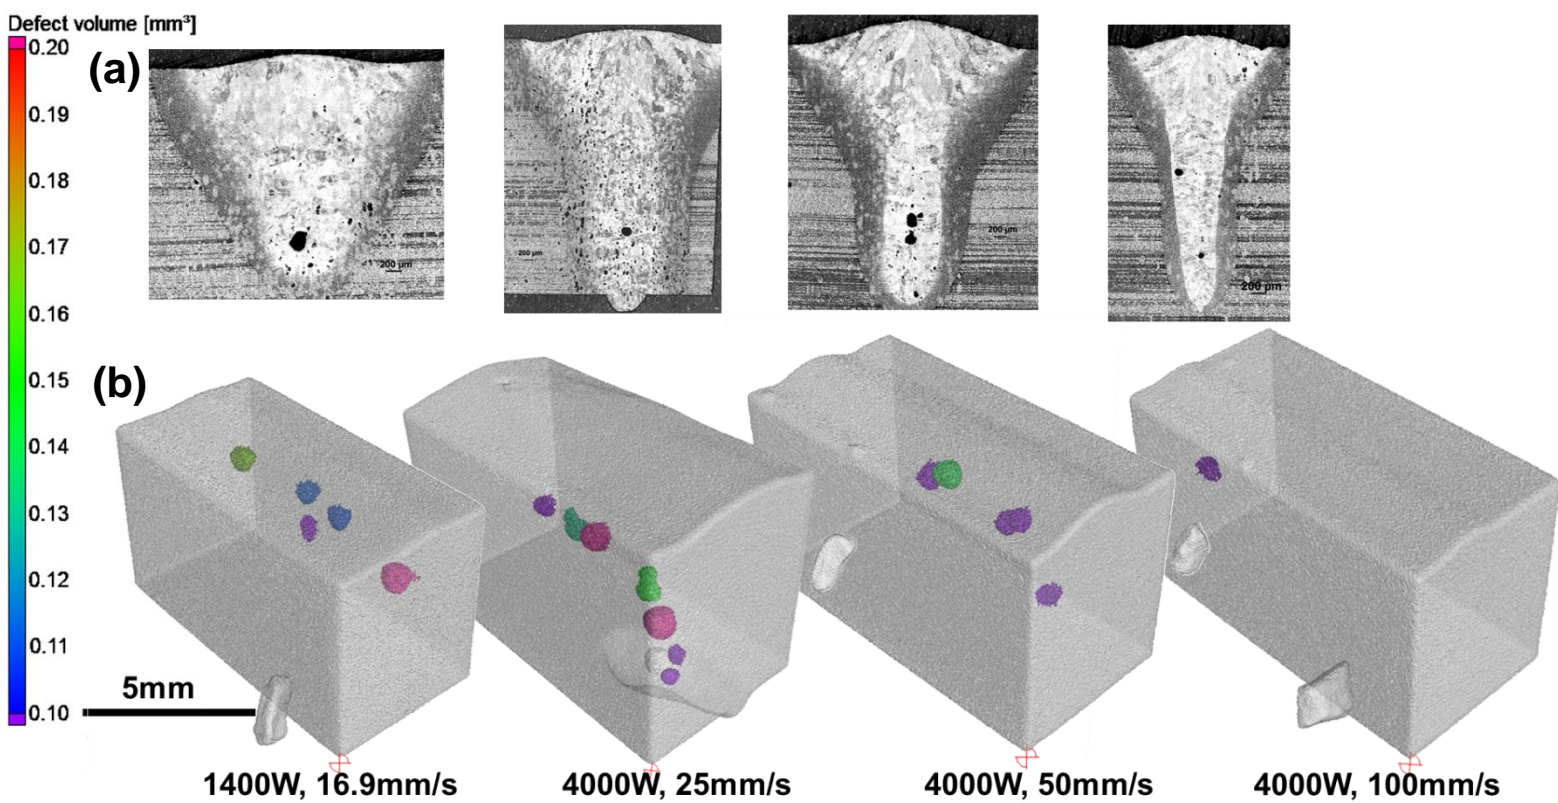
(a) optical micrographs and (b) reconstructed 3D x-ray tomography of the 5mm thick weld using the welding conditions of a 1400 W laser power weld with 16.9mm/s welding speed, and constant 4000W laser power welds with three welding speeds at 25mm/s, 50mm/s and 100mm/s.
